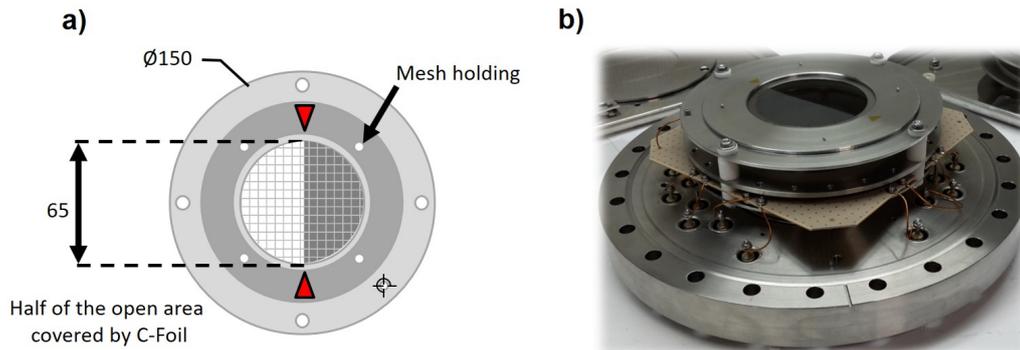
Design of the Carbon Foil detector especially designed for this study. (a) Top view of the CF assembly introducing a detection surface half covered by a CF mounted on a 70 lpi Nickel mesh. (b) Photograph of the CF-MCP-DLD assembly mounted on a 200-CF flange.
